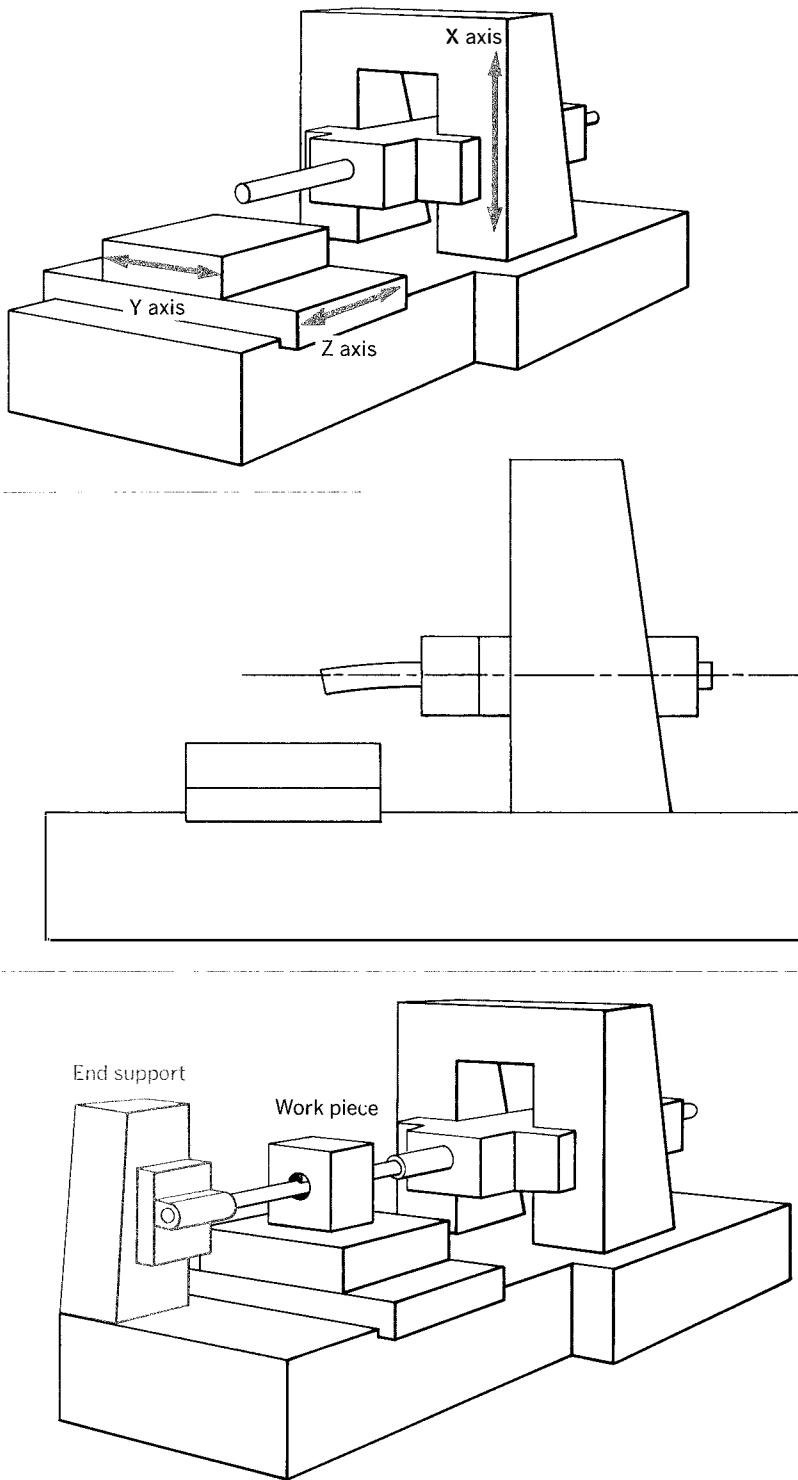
(center) The quill of the horizontal spindle jig borer sags of its own weight as it is extended from the housing.
